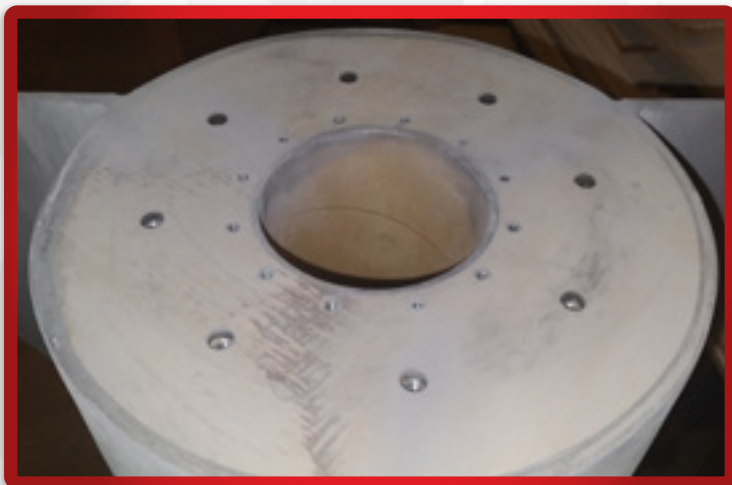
AFT CENTERING RING WITH TEE NUTS FOR SECURING THE THRUST PLATE AND THREADED INSERTS FOR THE MOTOR RETAINER INSTALLED WITH EPOXY.
